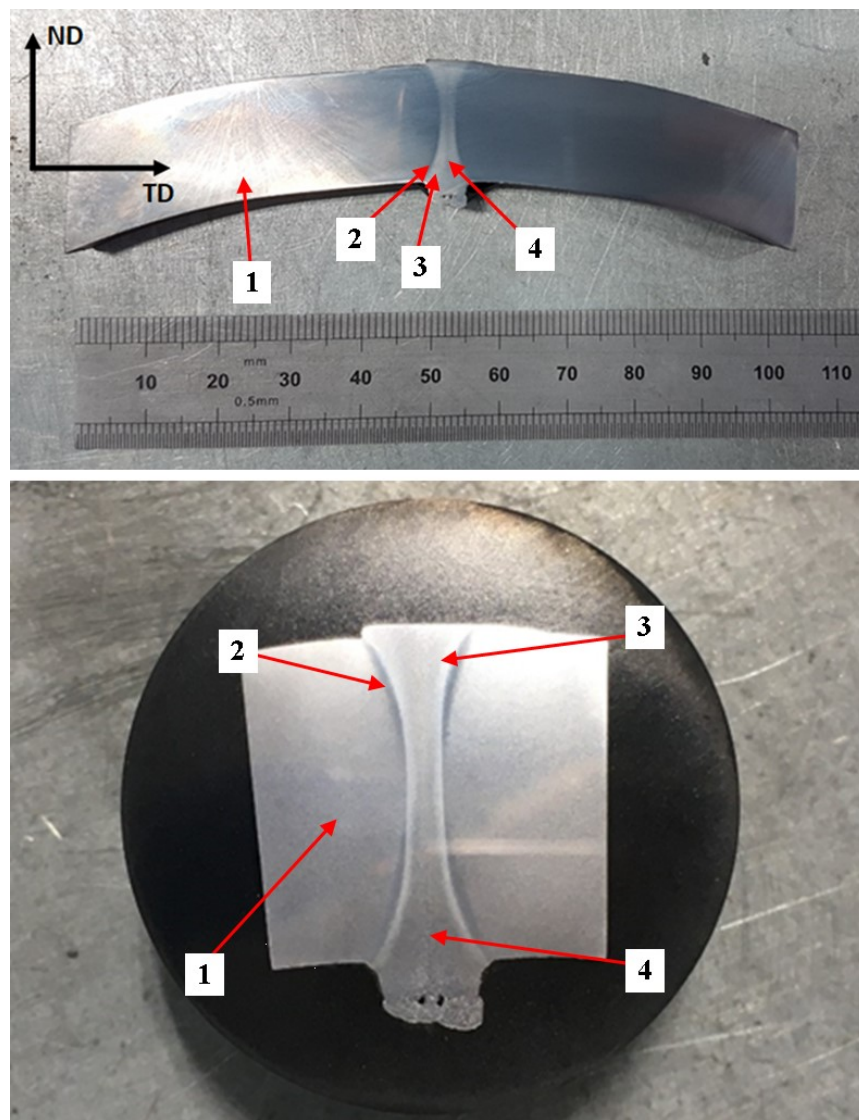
Macrostructure of 16 mm thick AW X60 HFI welded pipe weld. (1) Base metal, (2) TMAZ, (3) HAZ and (4) weld line.
